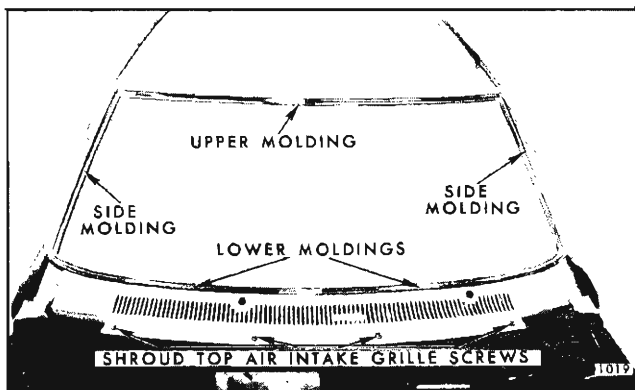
C14—Shroud Top Air Intake Grille and Windshield Reveal Moldings
